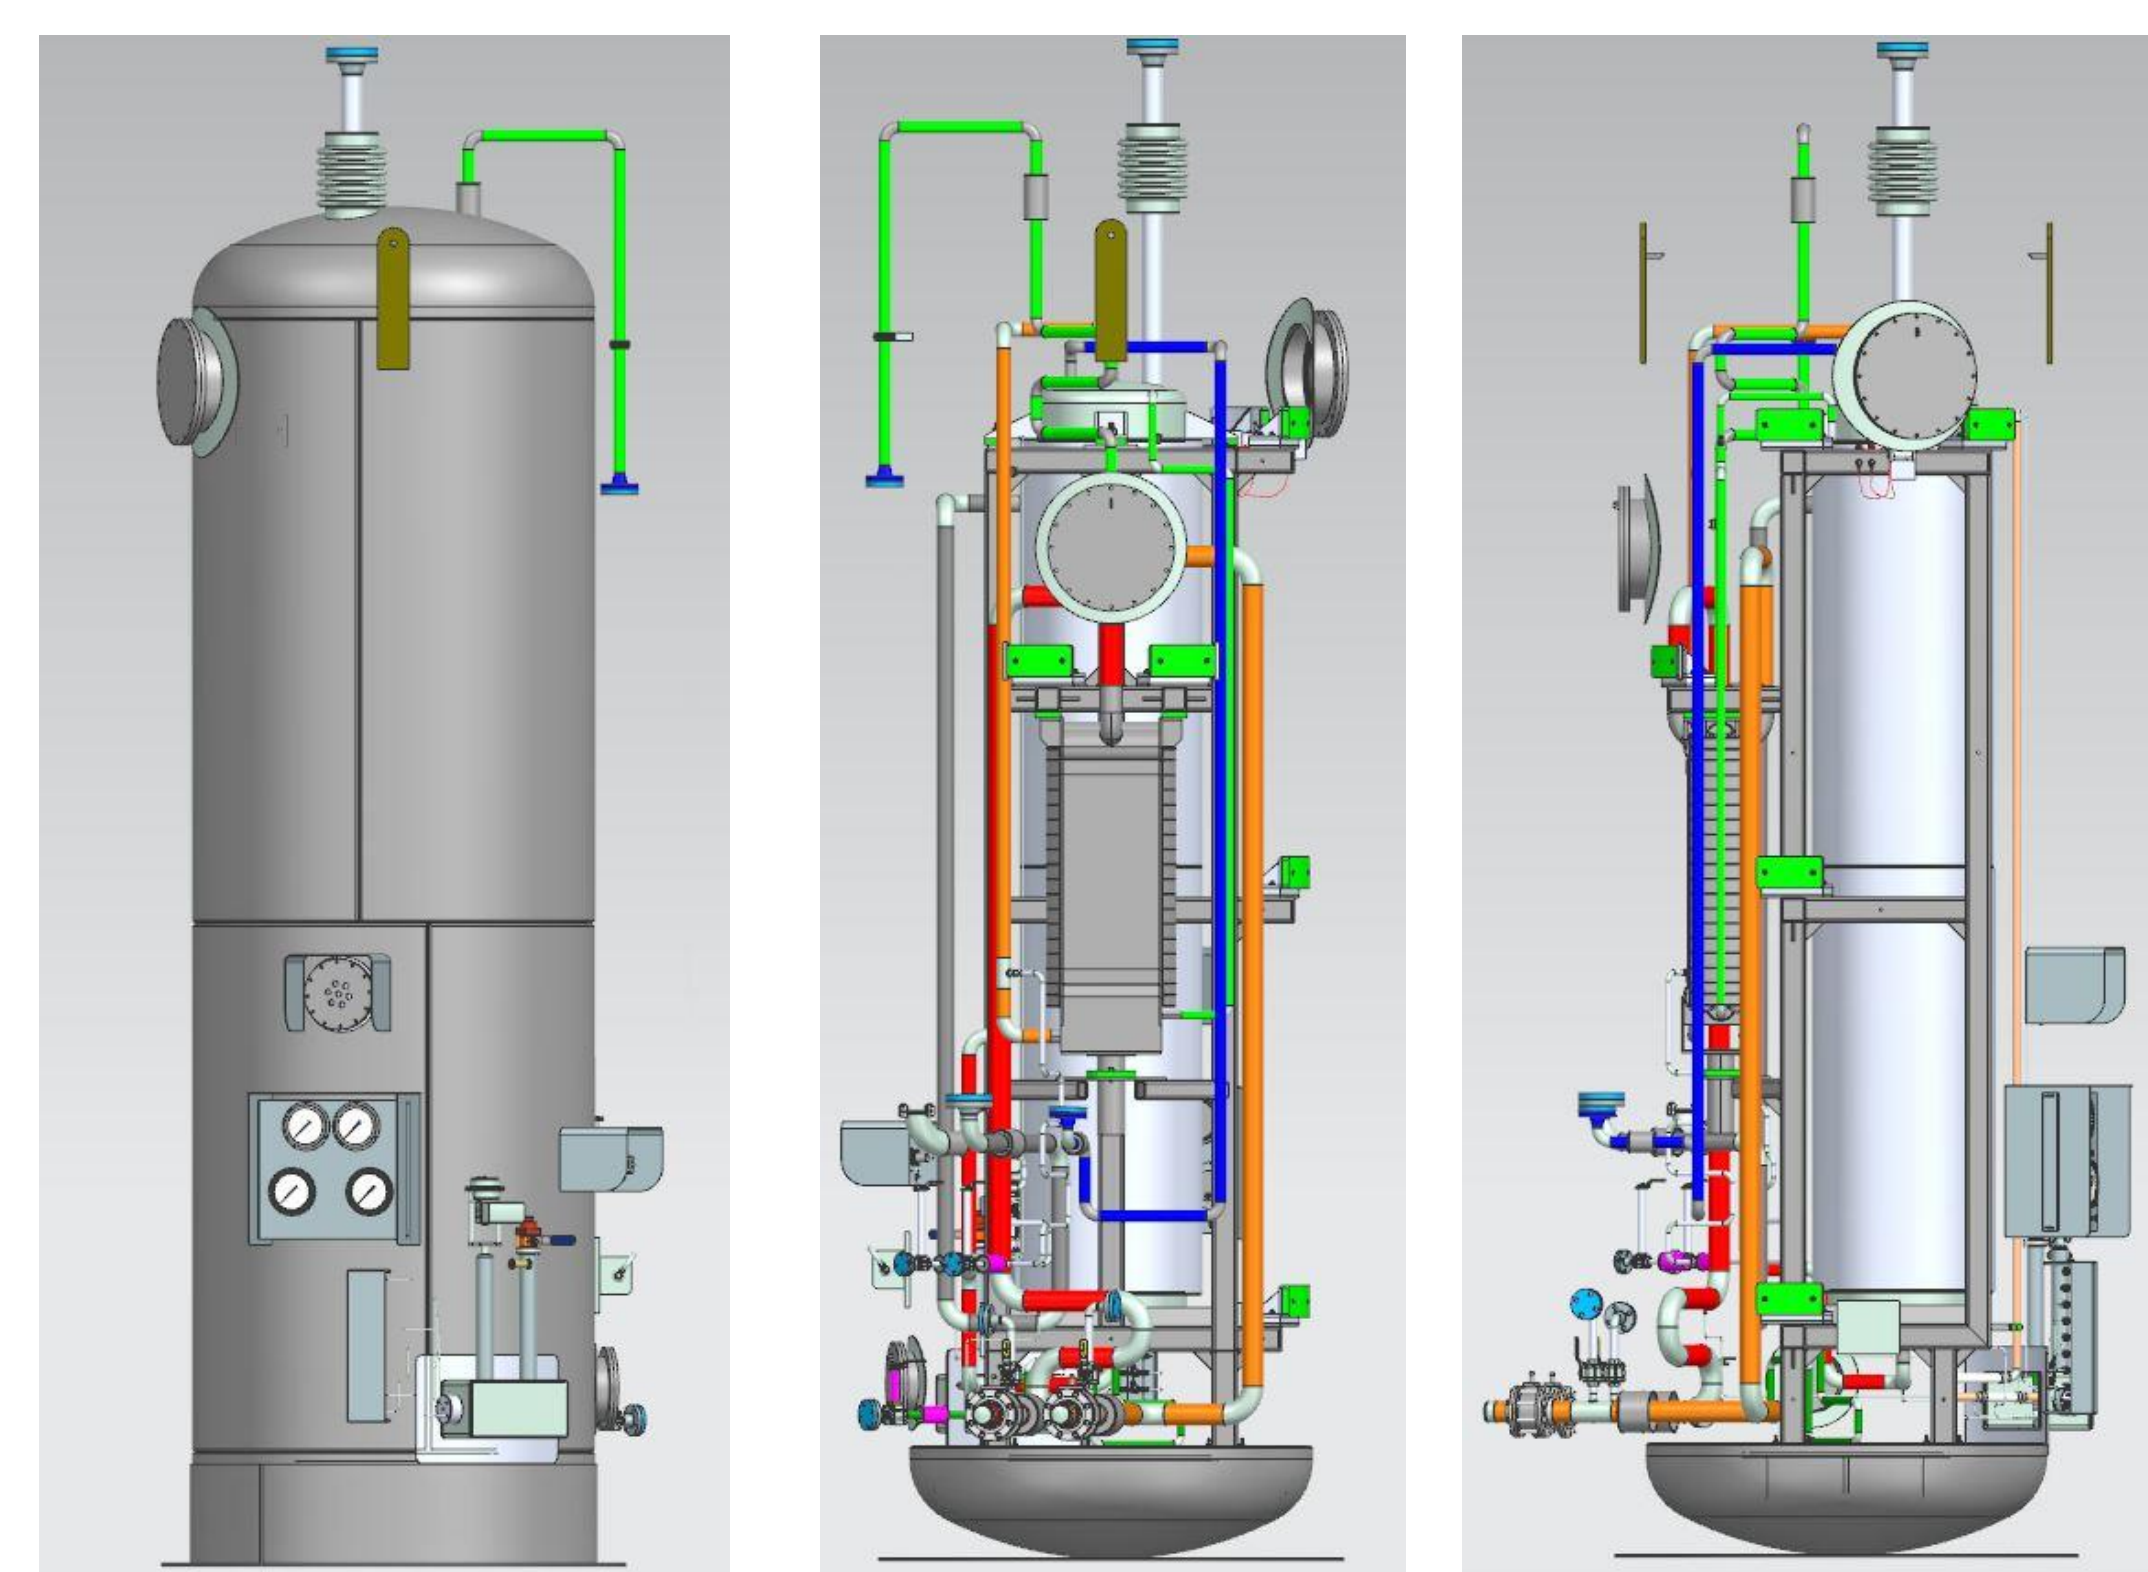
Final 3D model of purifier showing full assembly and internal view (Image courtesy: Ability Engineering Technology)
